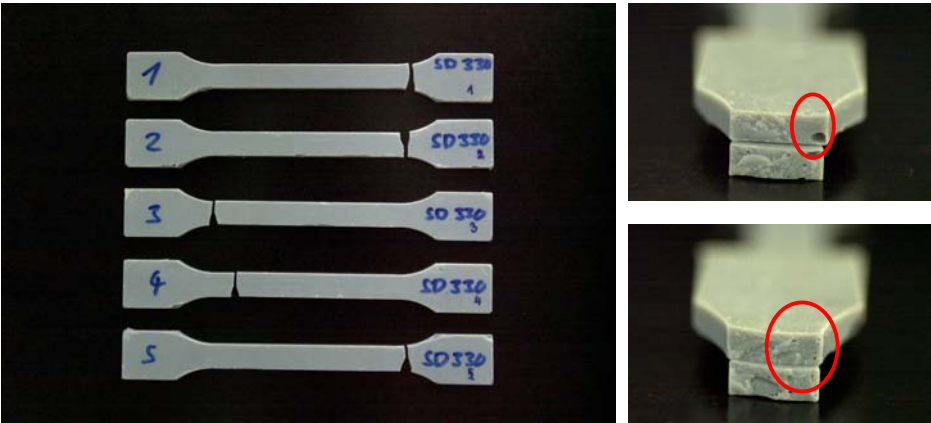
EP (a) tensile specimens after failure; fracture surfaces (b) EP-T.1, (c) EP-T.5
